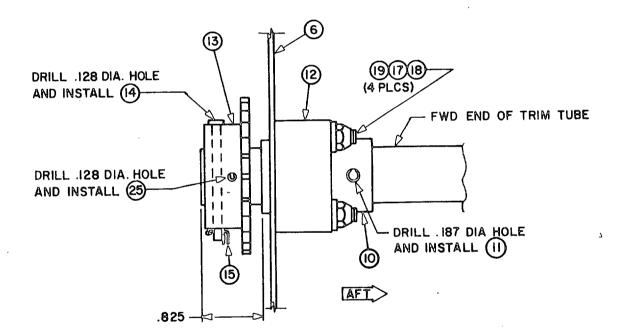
A TRIM TUBE BEARING AND SPUR GEAR
